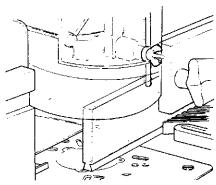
Flip the stock over and make the second pass to finish cutting the key shape in your workpiece.
